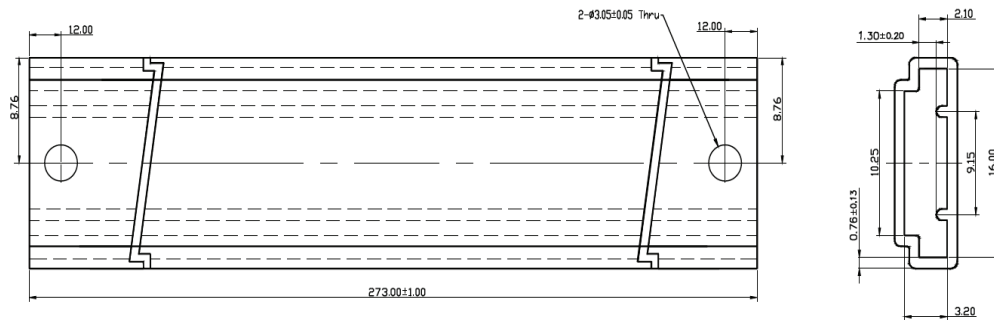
Tube dimensions for L2C5-xxxx1202x060x.
